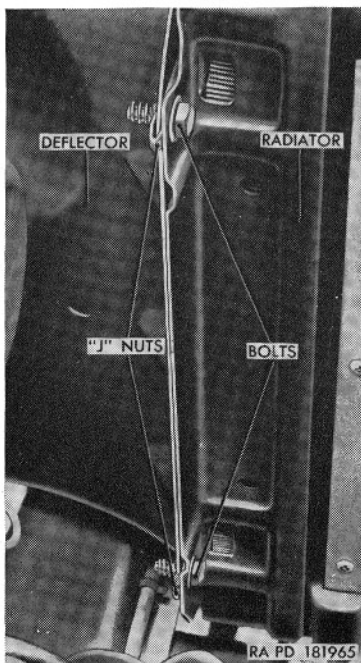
(Added) Radiator to guard panel *J* nuts M170—installed.
